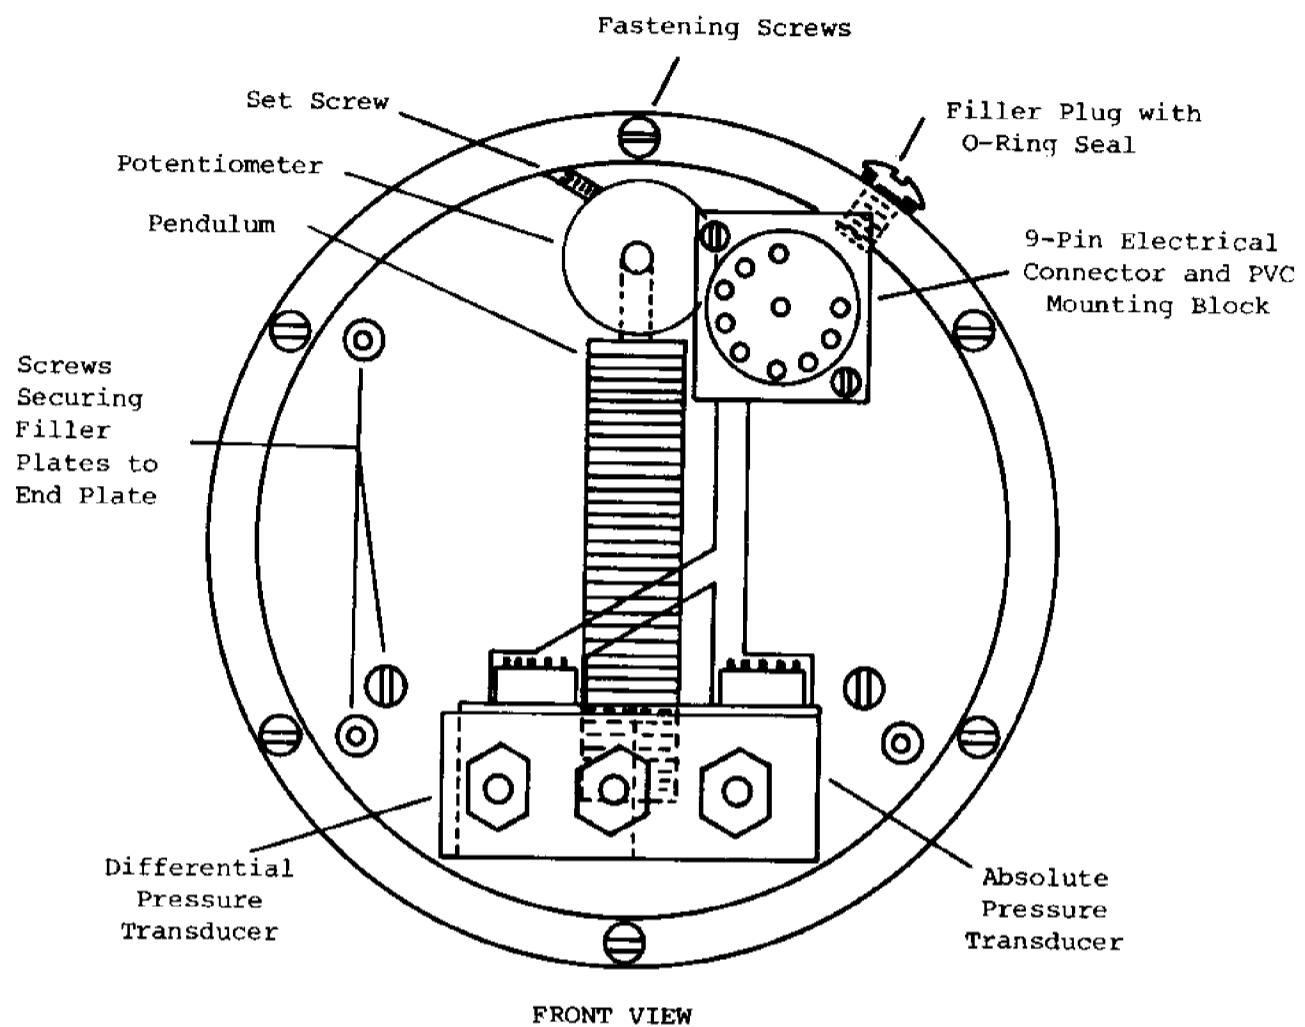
Front View of Multi-Sensor Package Showing External Location of Pressure and Electrical Connections
